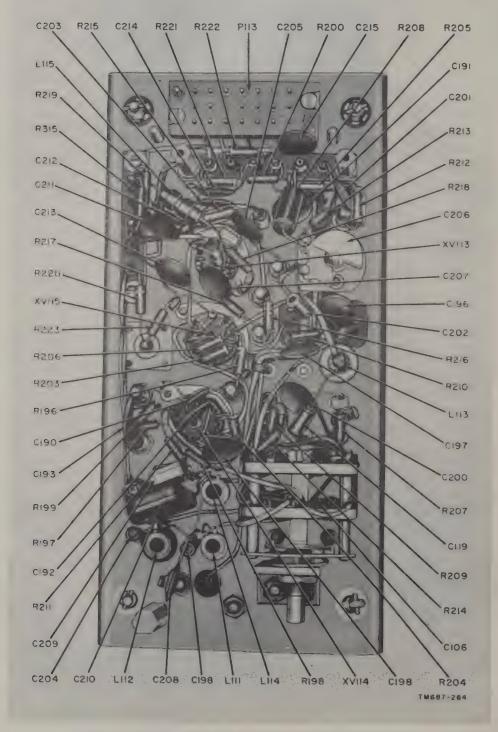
Crystal oscillator plug-in assembly, bottom view.
